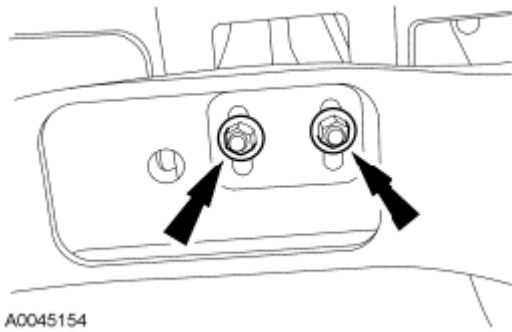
Identifying Transmission Mount-To-Crossmember Nuts
